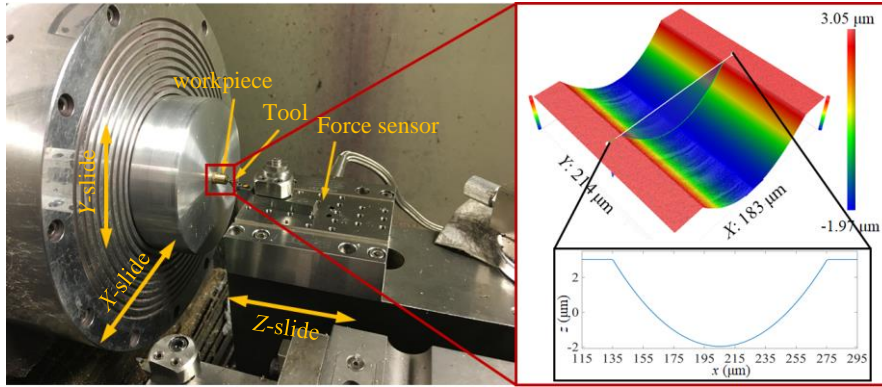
Experiment setup for diamond cutting and the machined micro-groove.
